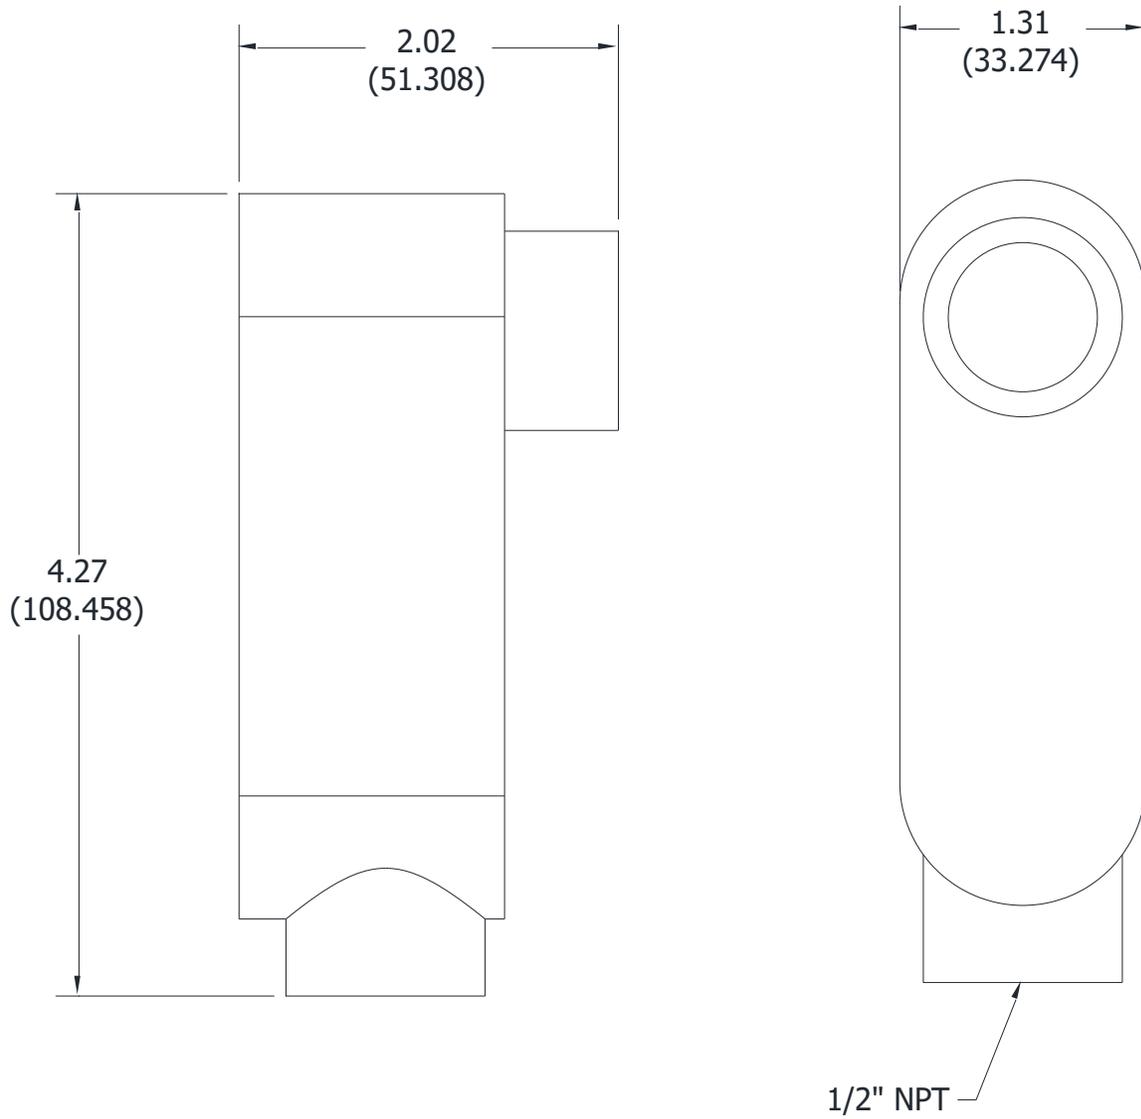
SC 370 Mounting and Outline (Stainless Steel Option)
